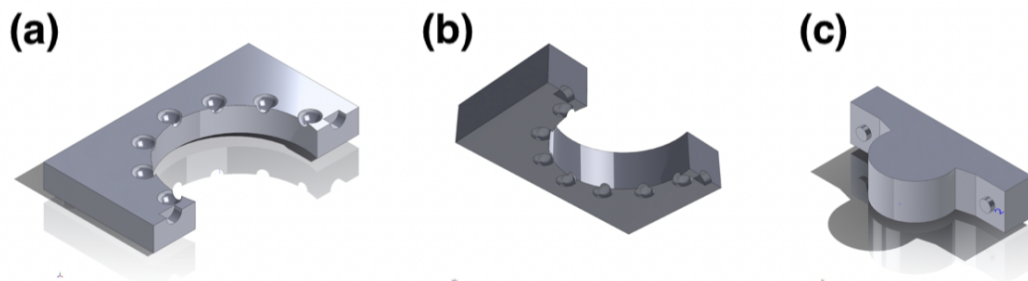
Isometric view of the second version of the mold used to cure bioplastic. (a) Bottom half of the bulb side. (b) Top half of the bulb side. (c) Third part to hold the mold pieces together. All pieces are made with an Ultimaker 3D printer and then assembled and taped to ensure water-tightness. Bioplastic solution is then poured into the vacant space on the top mold.
